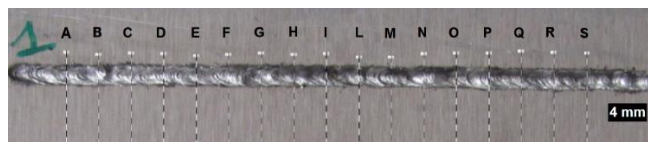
Electronic microscope image: Test 1AL weld track.
